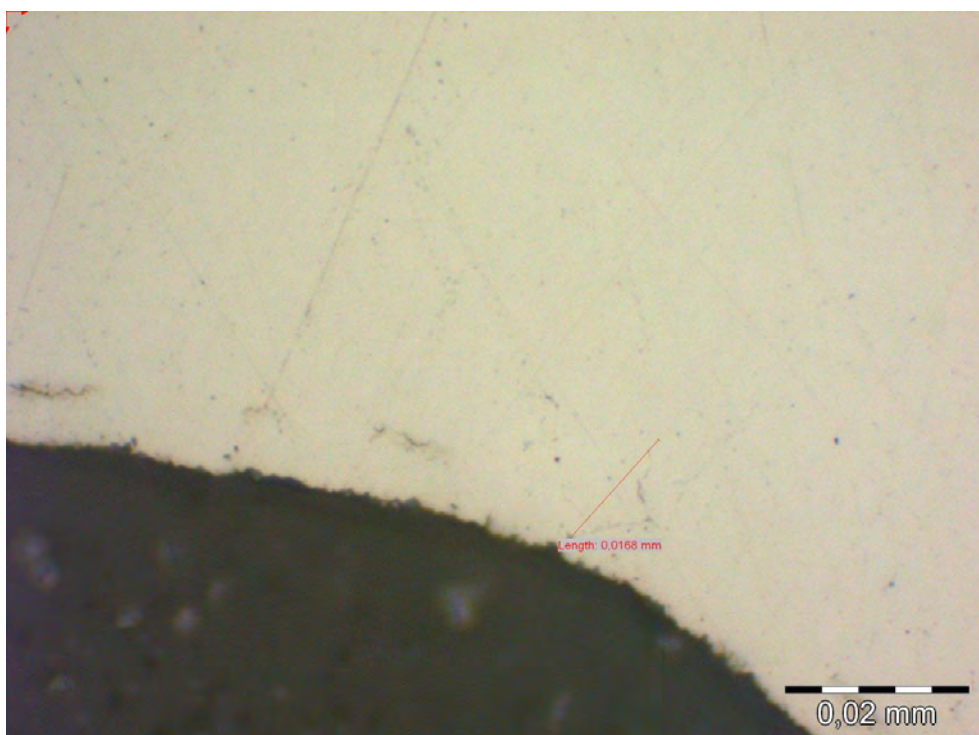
Crack at segment B, fourth ridge on barrel no. 1393
